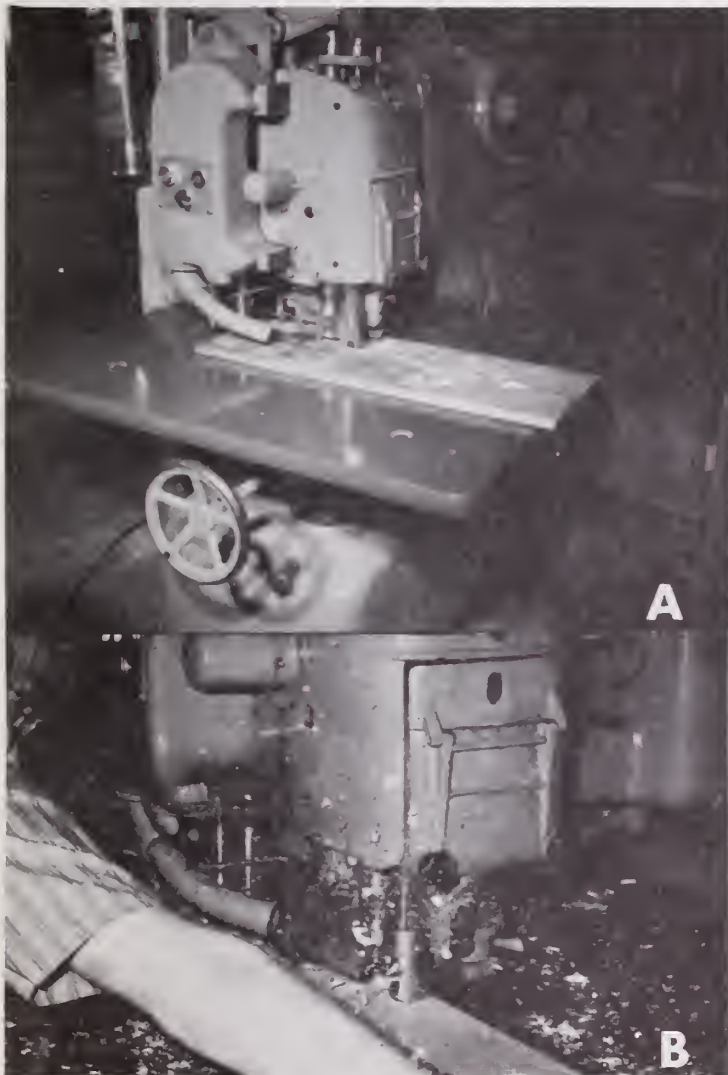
Lumber plugging machine, A, bores out the defect, B, cuts a patch to size, applies adhesive, and sets the patch in a single sequenced operation.
